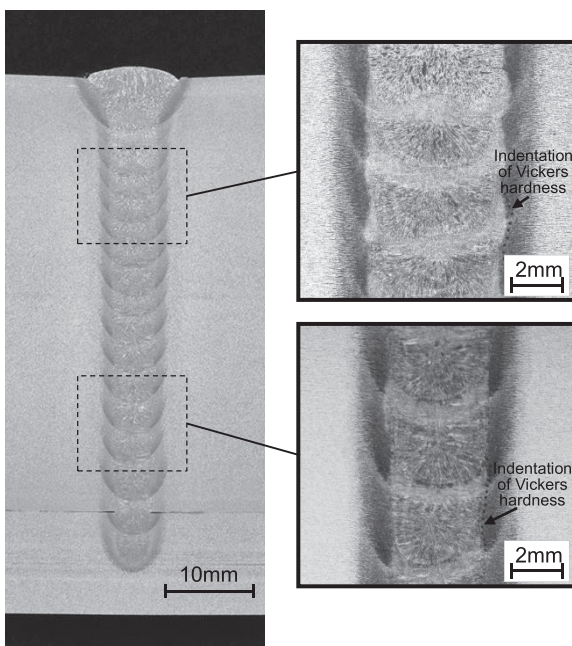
Cross section of narrow gap multi-layer welding bead
